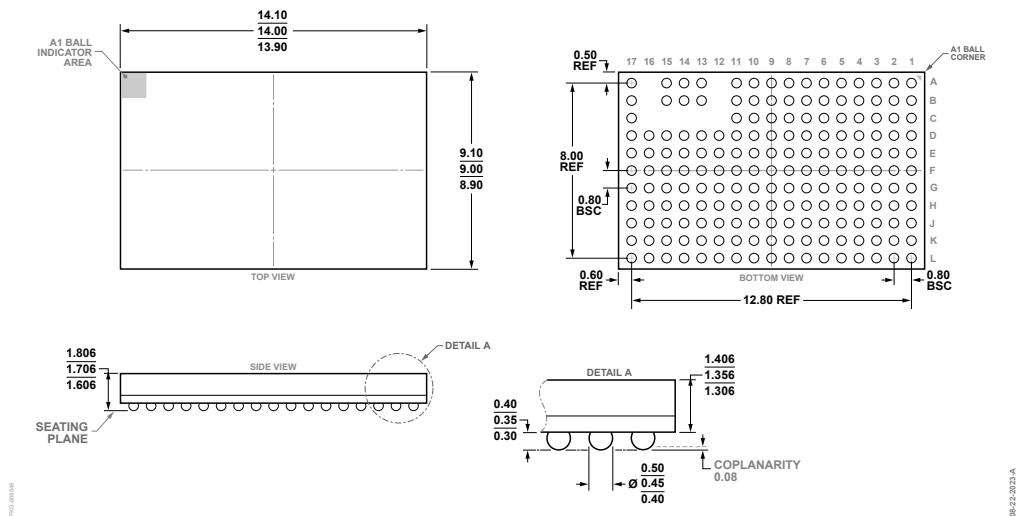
178-Ball Chip-Scale Package, Ball Grid Array [CSP_BGA]
